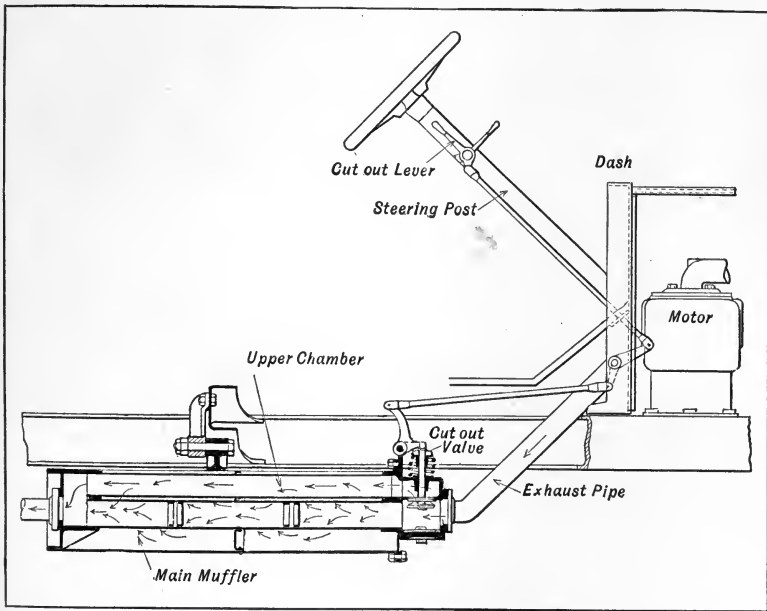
How Muffer Cut-out Valve is Arranged on Wolseley (English) Cars to Reduce Noisy Direct Exhaust.
